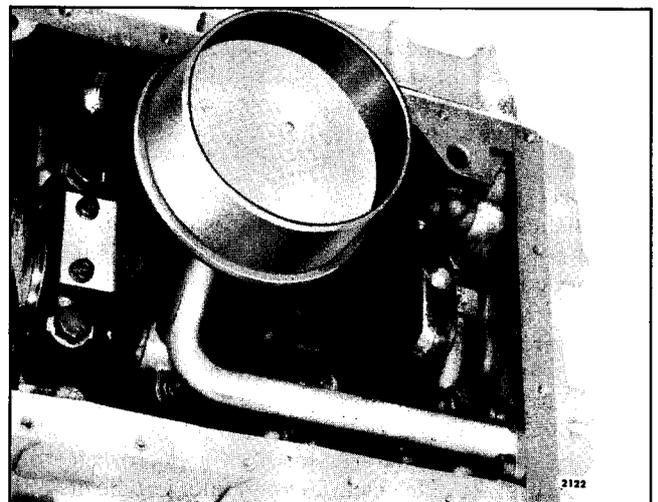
Typical Oil Pump Inlet Pipe and Screen Mounting
